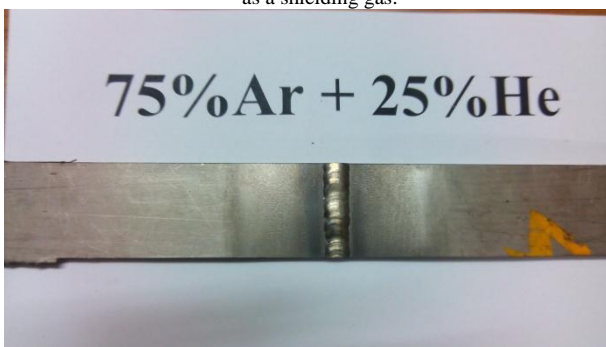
shows welded job for making tensile test specimen, when 75% Ar + 25% He used as a shielding gas.
